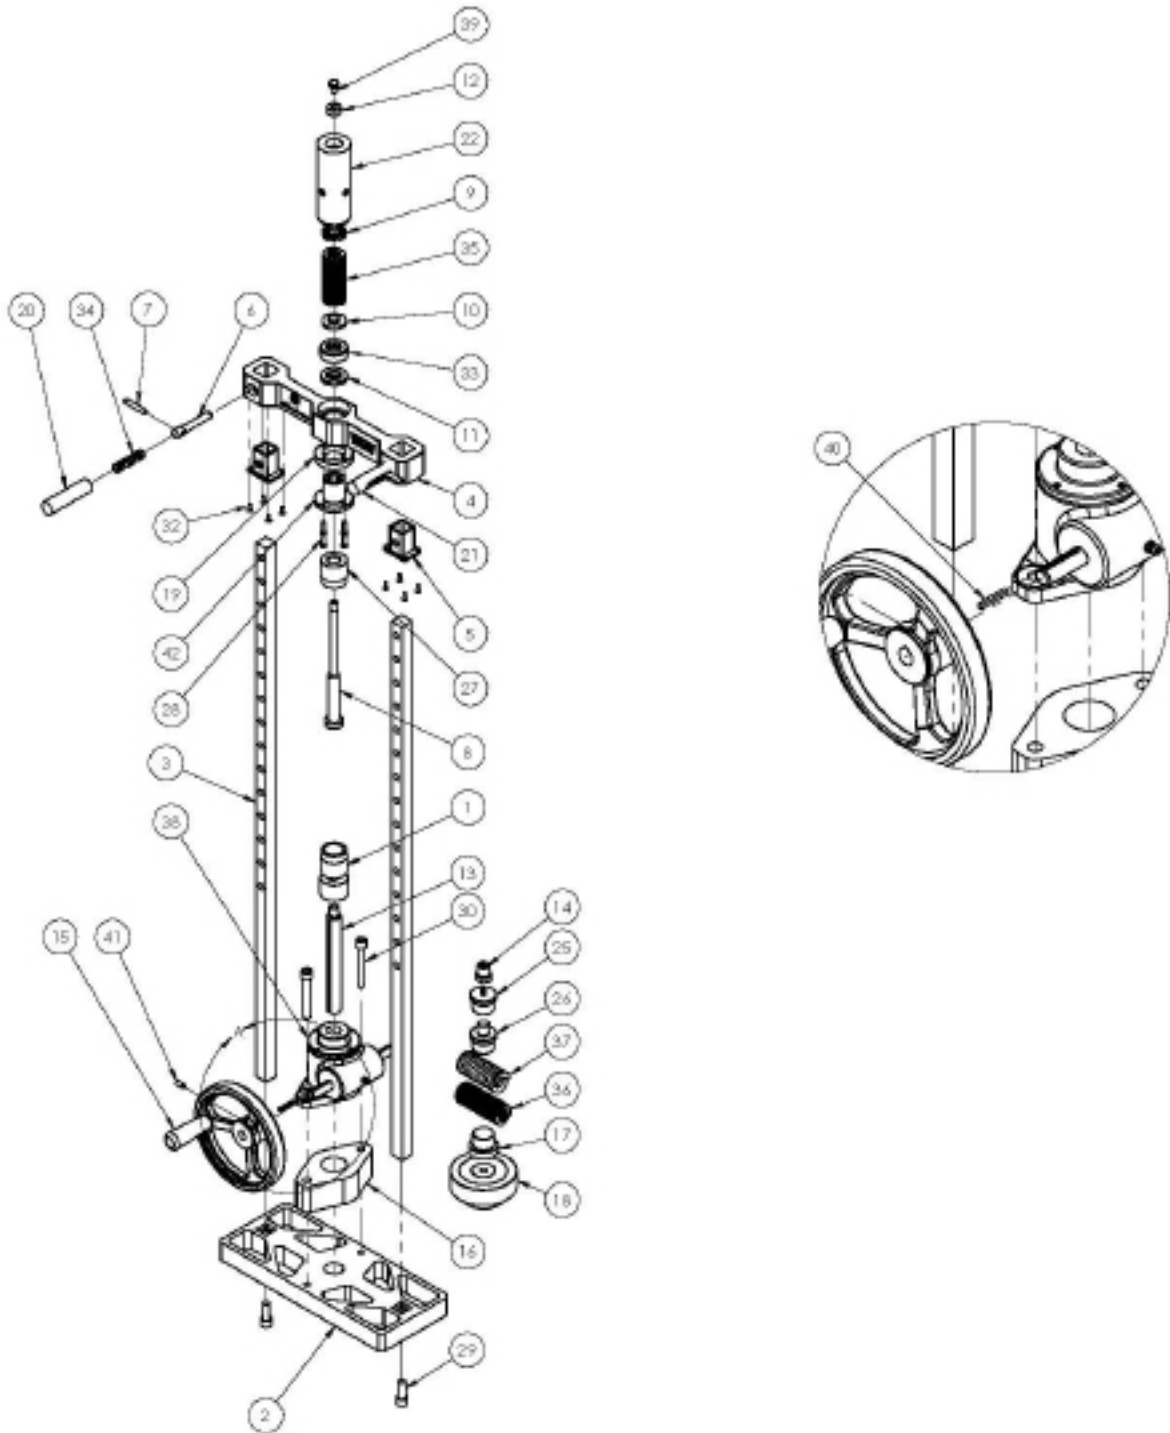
General Assembly of a Portable Calibrating Machine, Model: PCM-2MD-02
